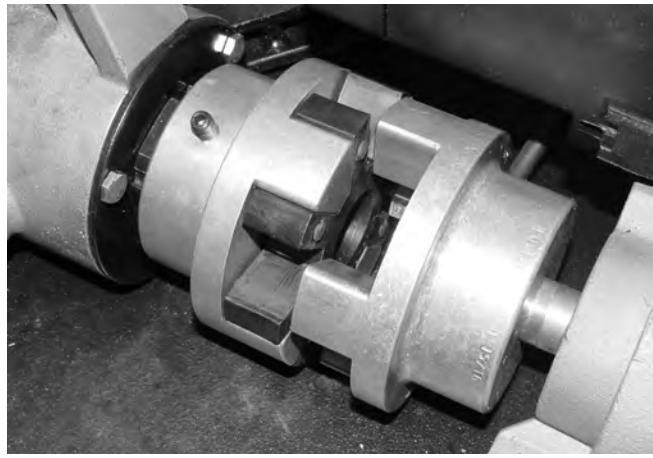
Removing Bearing, Retaining Nut and Front Half of Coupling
